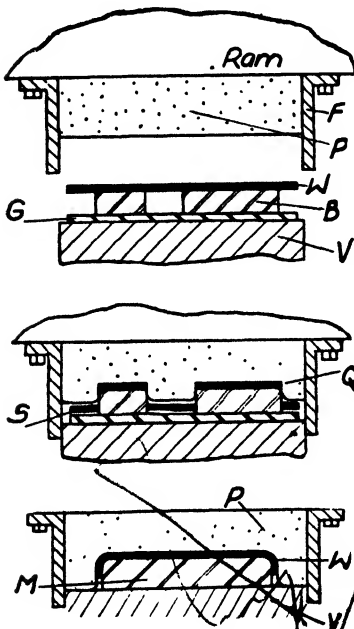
Forming and Blanking by Using a Rubber Pad.
